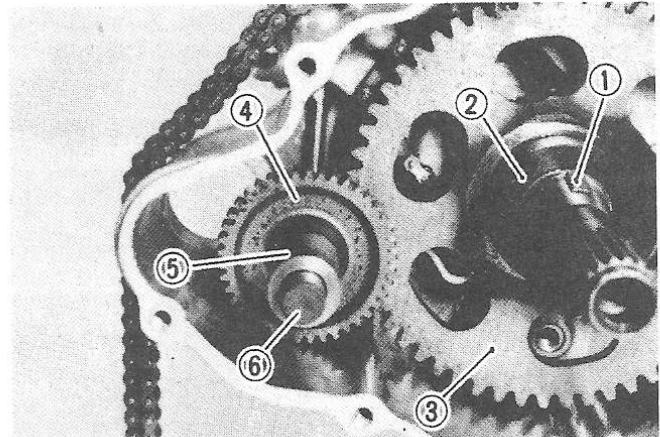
B.41 Electric starter idler gear components (Sec 22)
